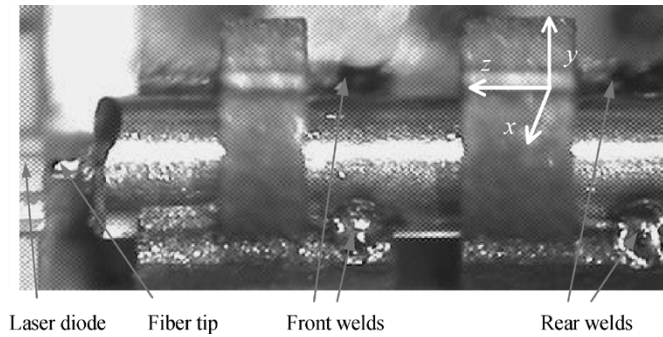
Front and rear weld placement in relation to laser diode.
